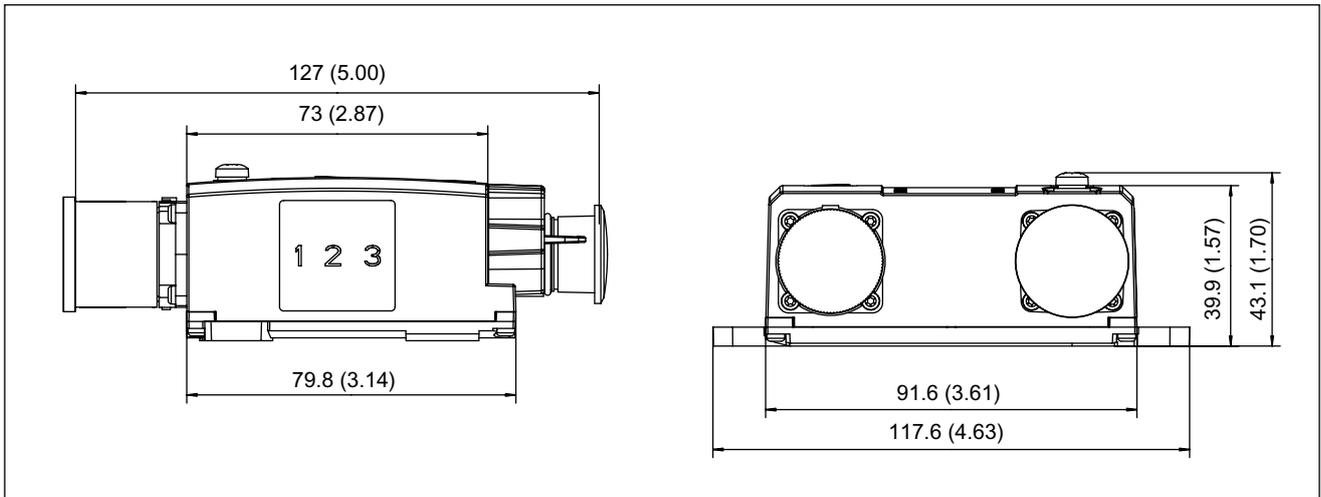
Dimension drawing SME125, Order number 6SL3055-0AA00-5KA3
